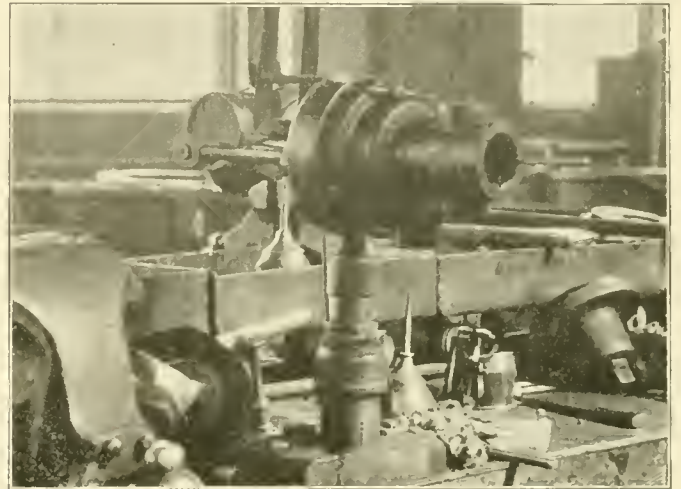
View Showing Thermit Welds and Front Deck Casting Ready to Be Applied
